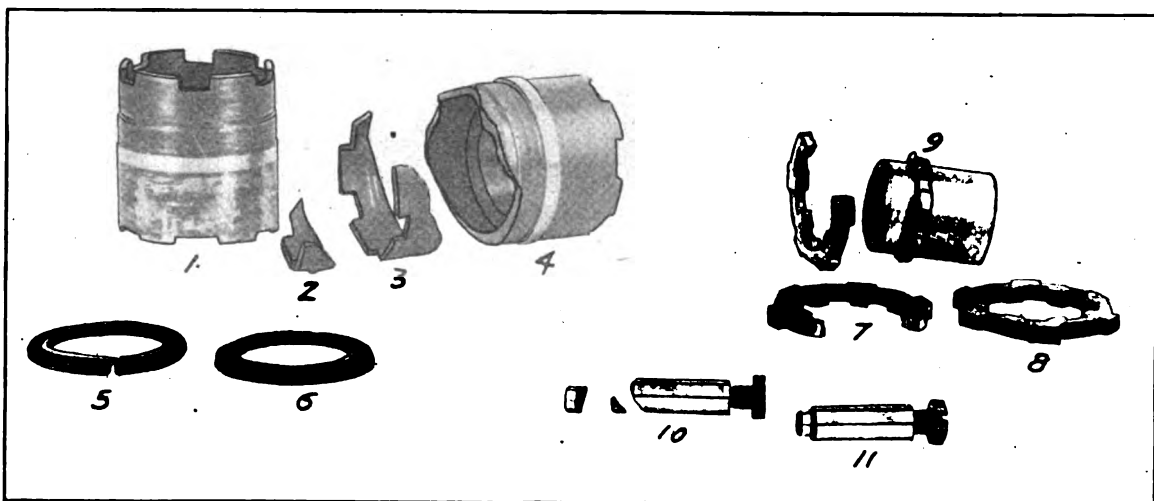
Bijur (rear end) starter, showing failure of several parts.
